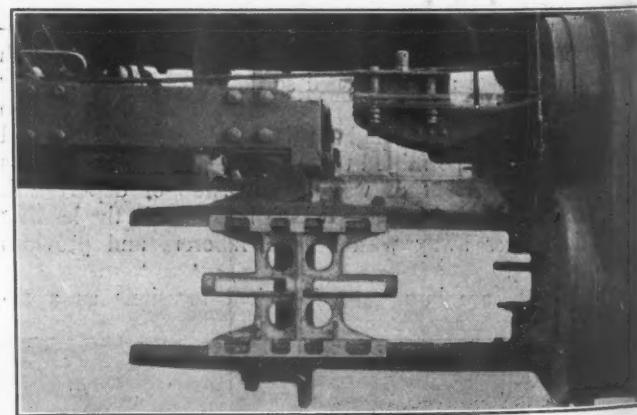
Aluminum Dummy Crosshead for Lining Guide Bars
